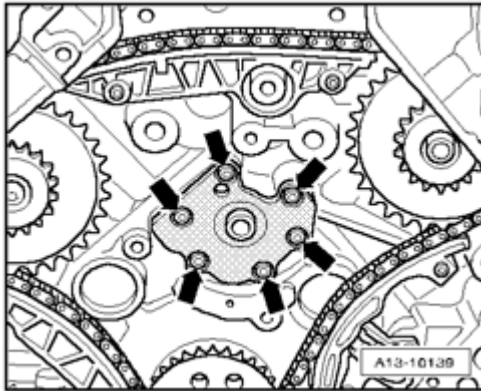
Removing Bolts And Bearing End Bracket From Balance Shaft At Rear Of Engine
